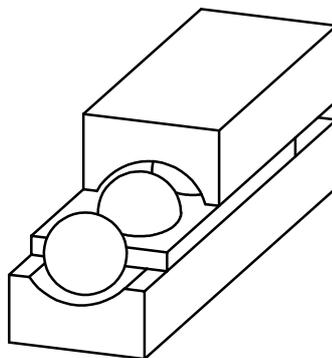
Non-recirculating linear ball bearing, linear guideway, deep groove type
